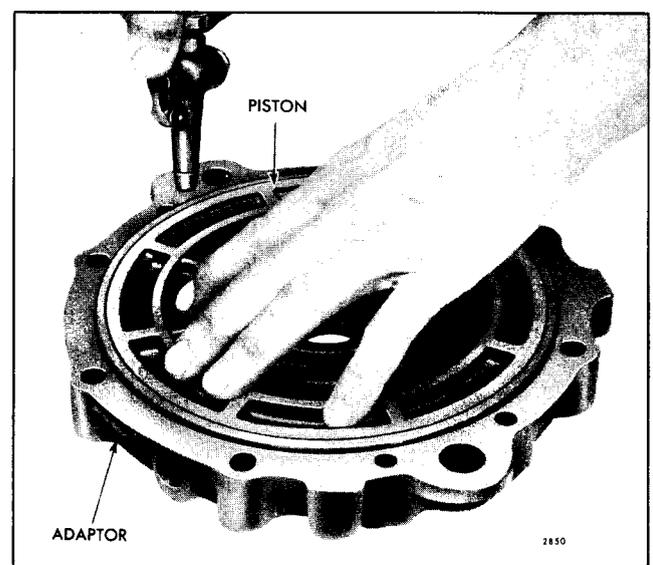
· Removing Reverse Clutch Piston from Gear Housing Adaptor
